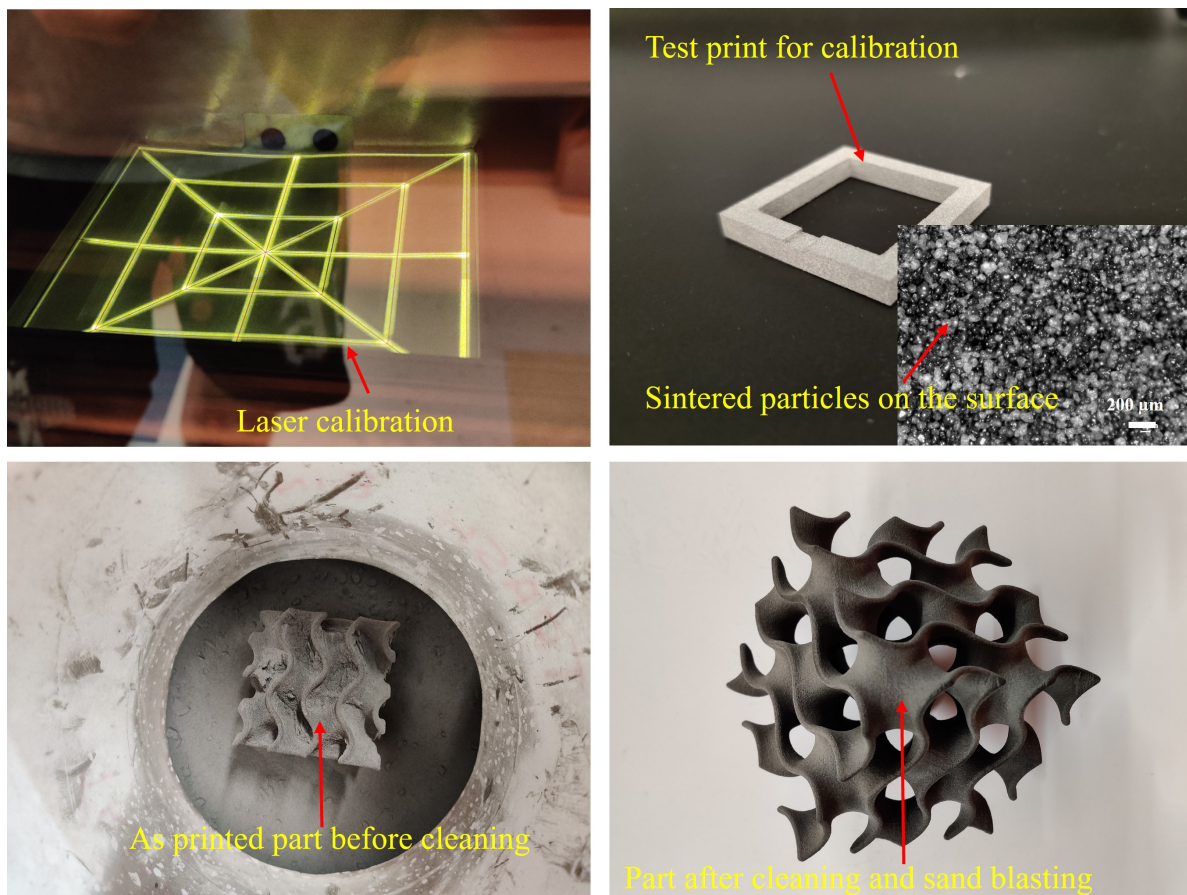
Laser calibration and test print (top row). Printed part cleaning (bottom row).
